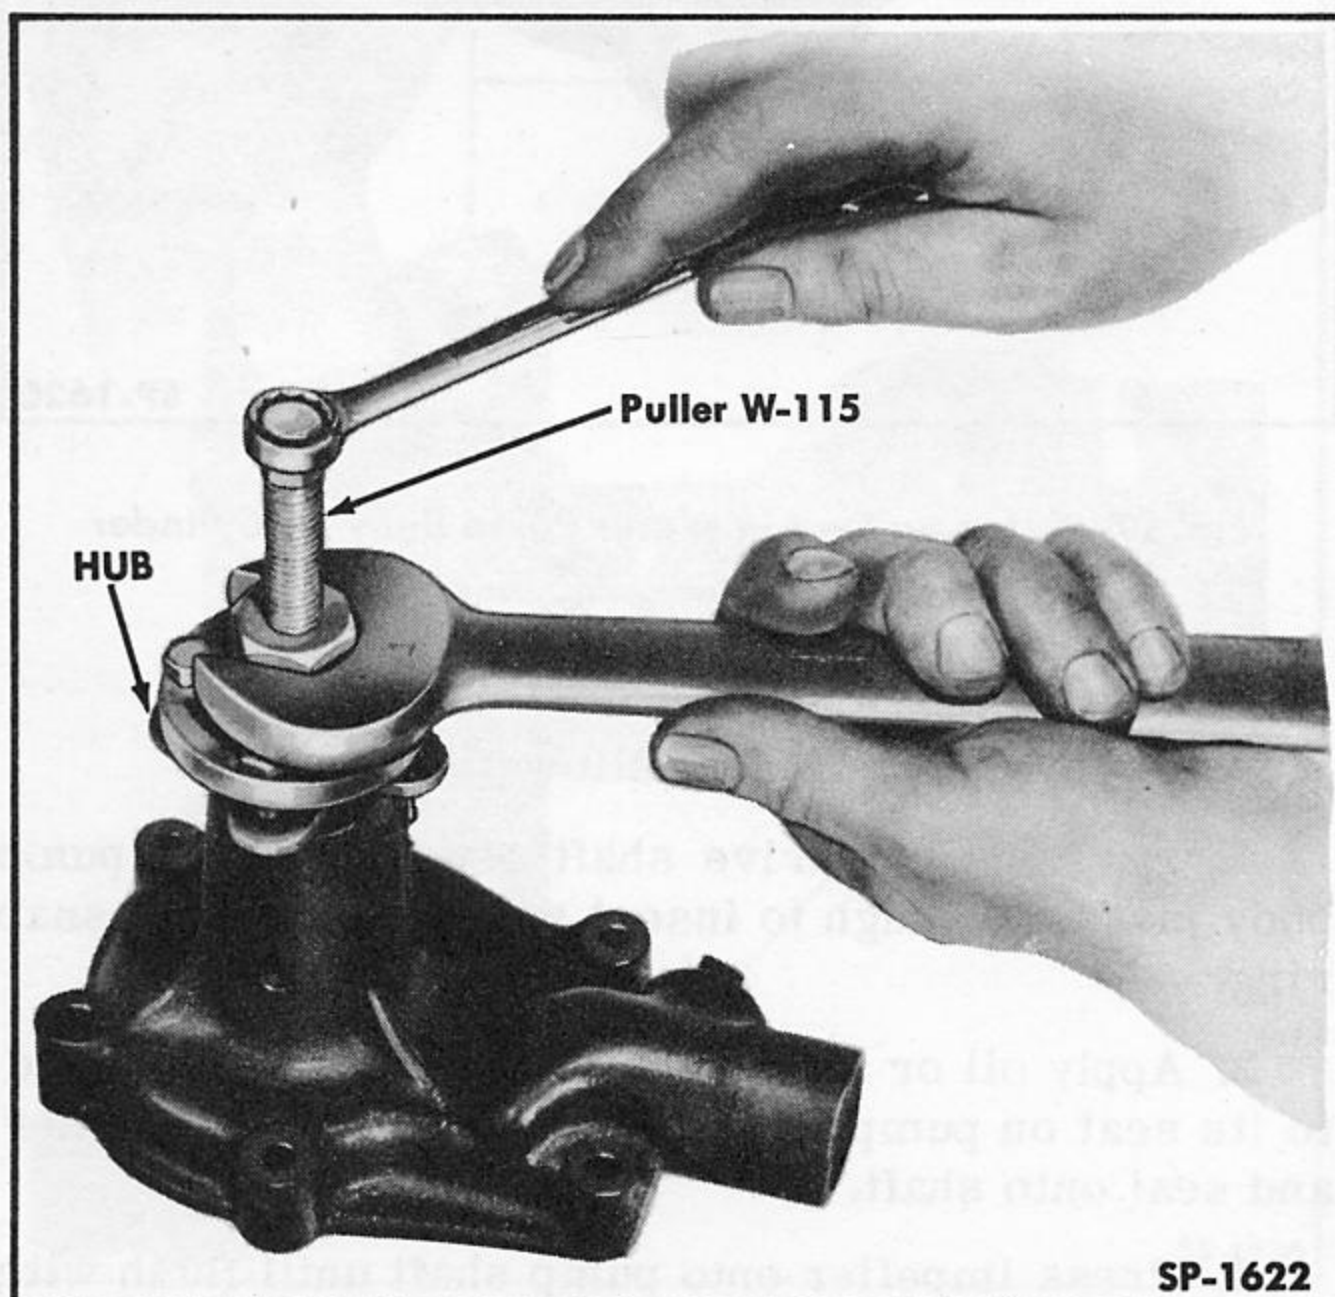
Removing Water Pump Fan Hub (6 Cylinder Shown)
